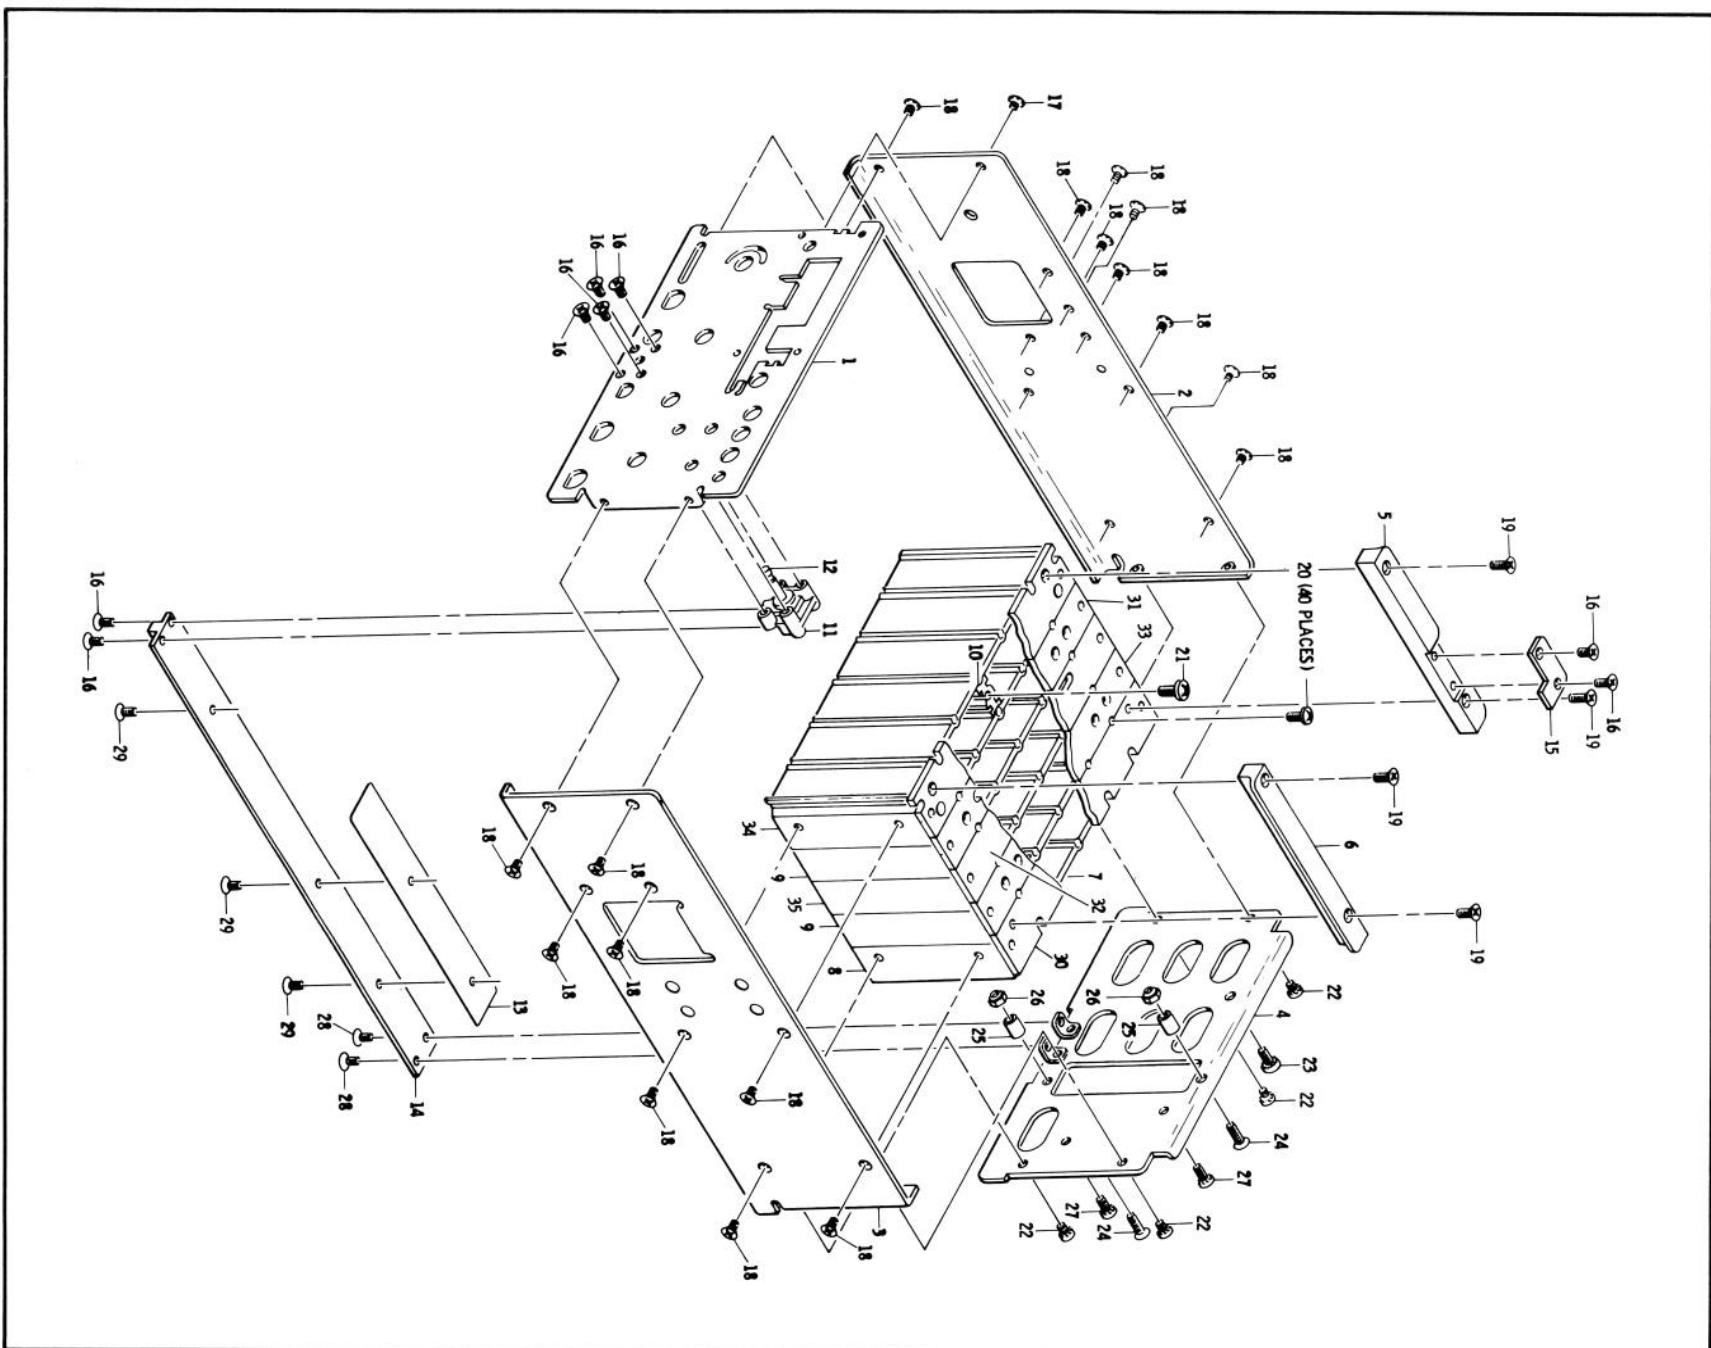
MECHANICAL CHASSIS PARTS (2 OF 2) (2145A &amp; BELOW)
